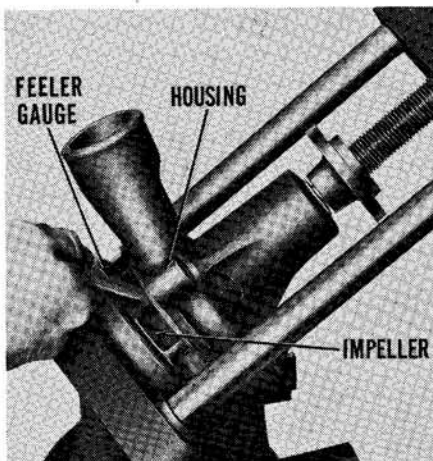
Using feeler gage to check clearance between pump housing and impeller; refer to text.
